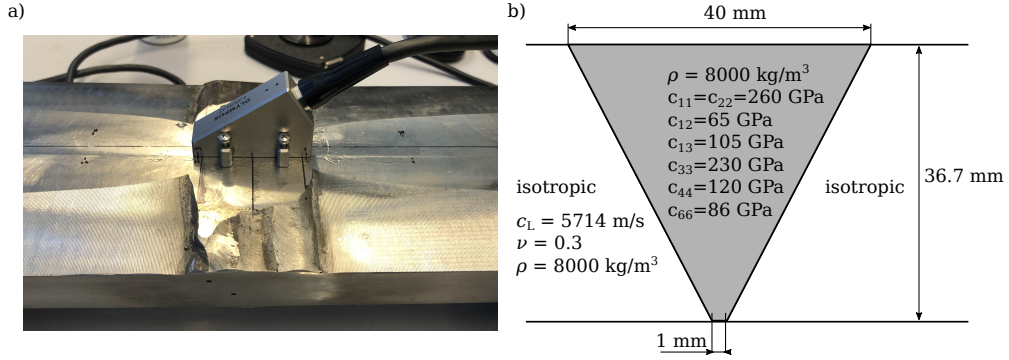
ADVISE WP2 mock-up and the transducer used in weld map tomography: a) a photograph; b) dimensions with material properties.
